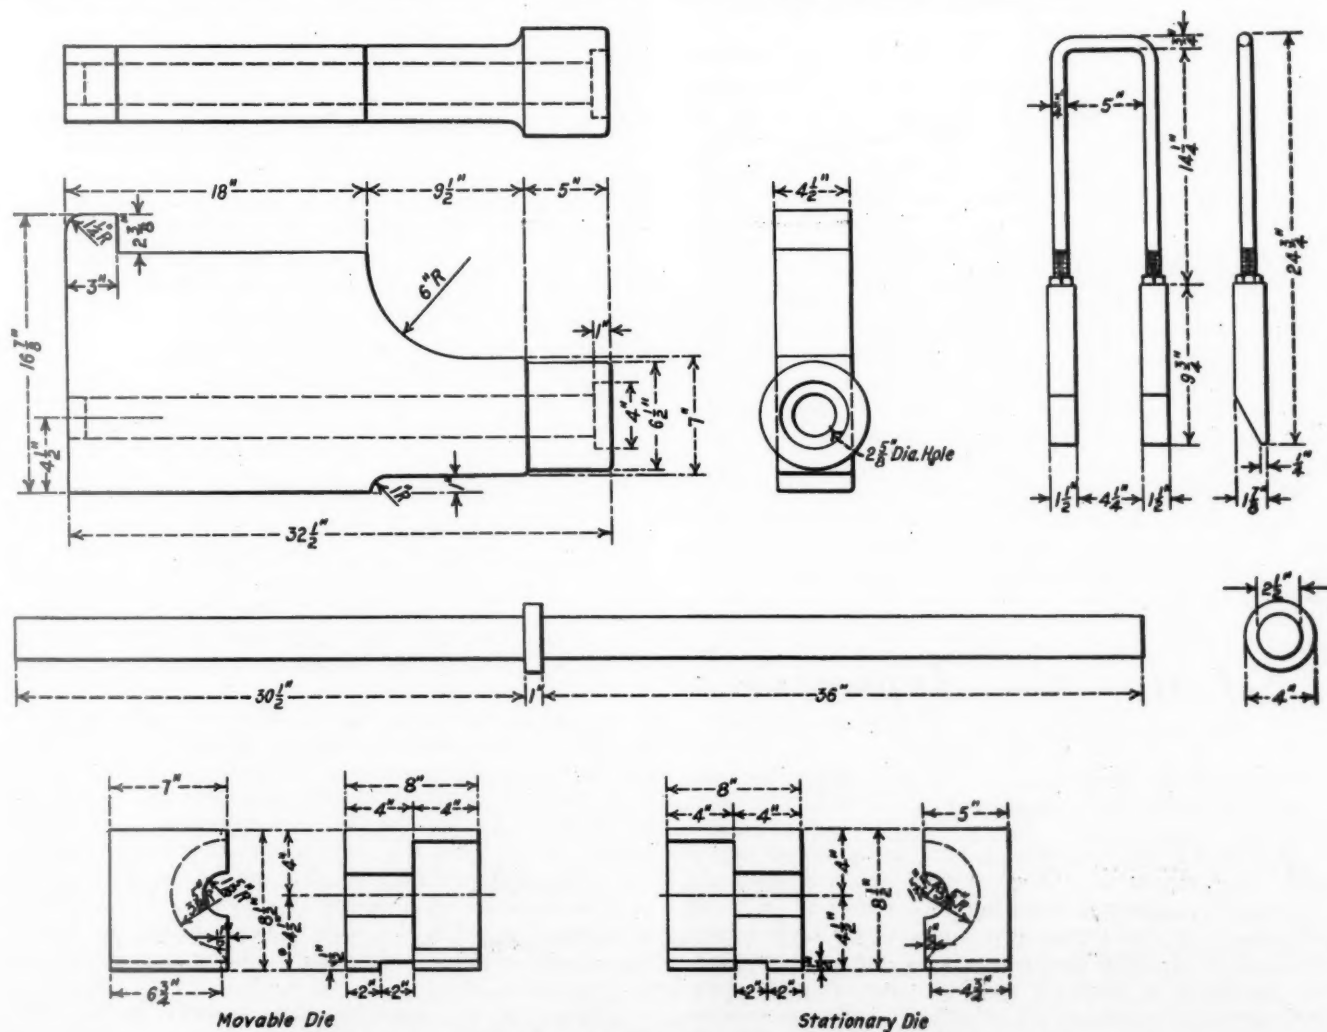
Dies for forging valve stems on a 3½-in. Ajax forging machine
